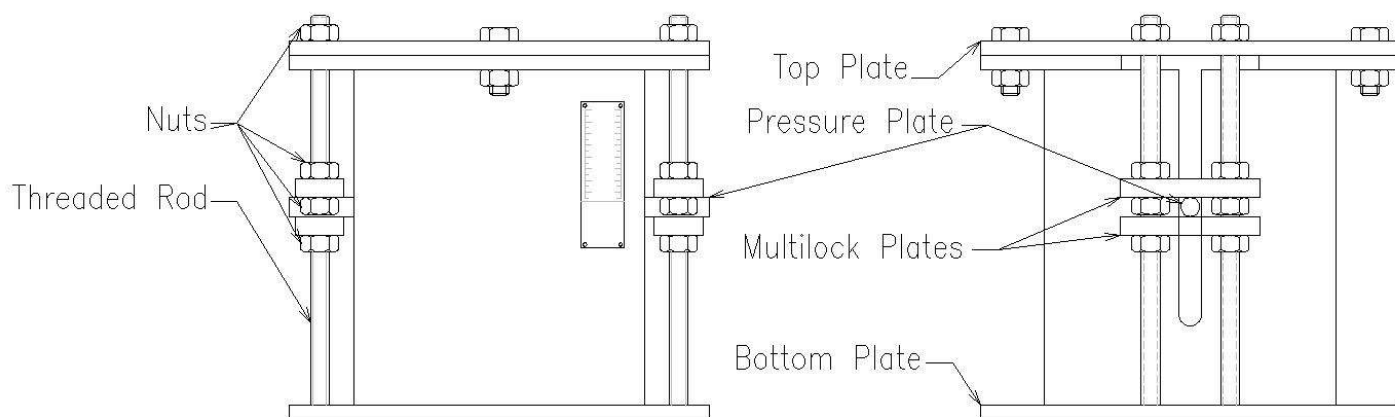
View of a typical assembly with "multilocks". Locked position is shown. Spring Coil, Load Bar and Turnbuckle are not shown, although the same as shown in figure 4.1
